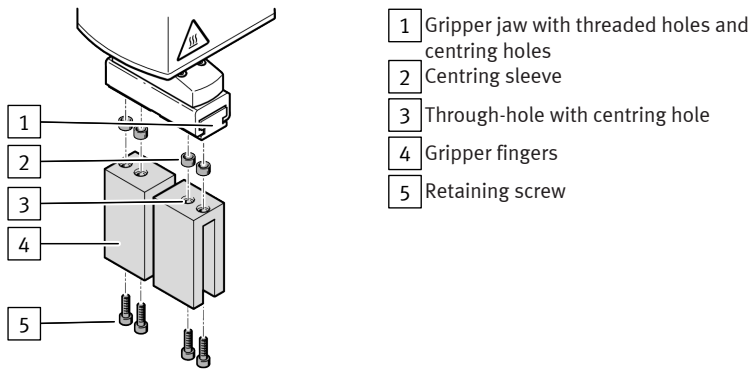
Mounting gripper fingers directly, showing gripper jaw blank BUB-HGPT
